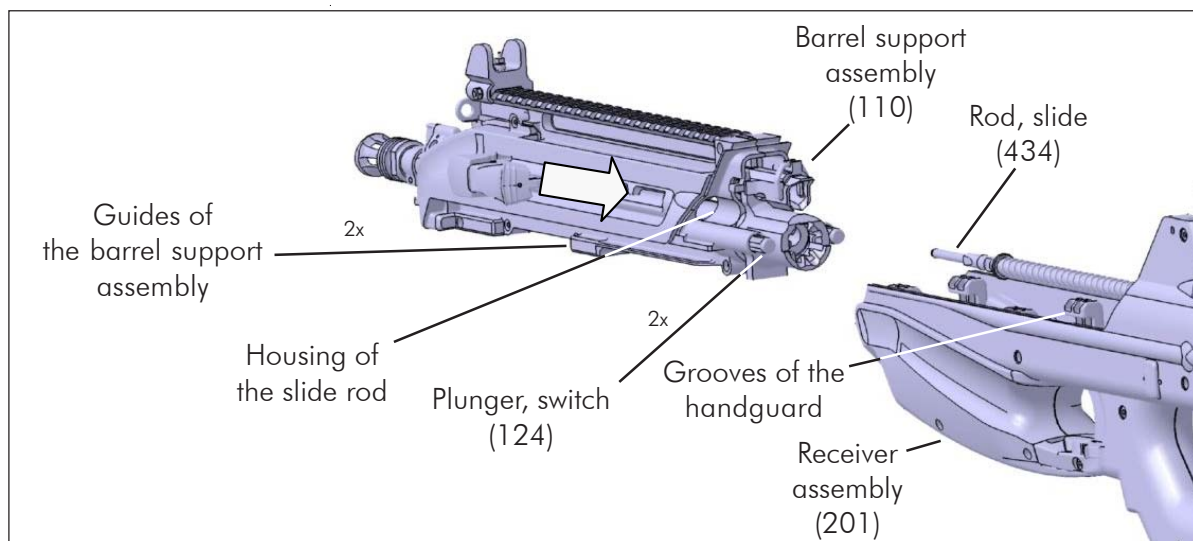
q - Reassembly of the barrel support assembly (110)
